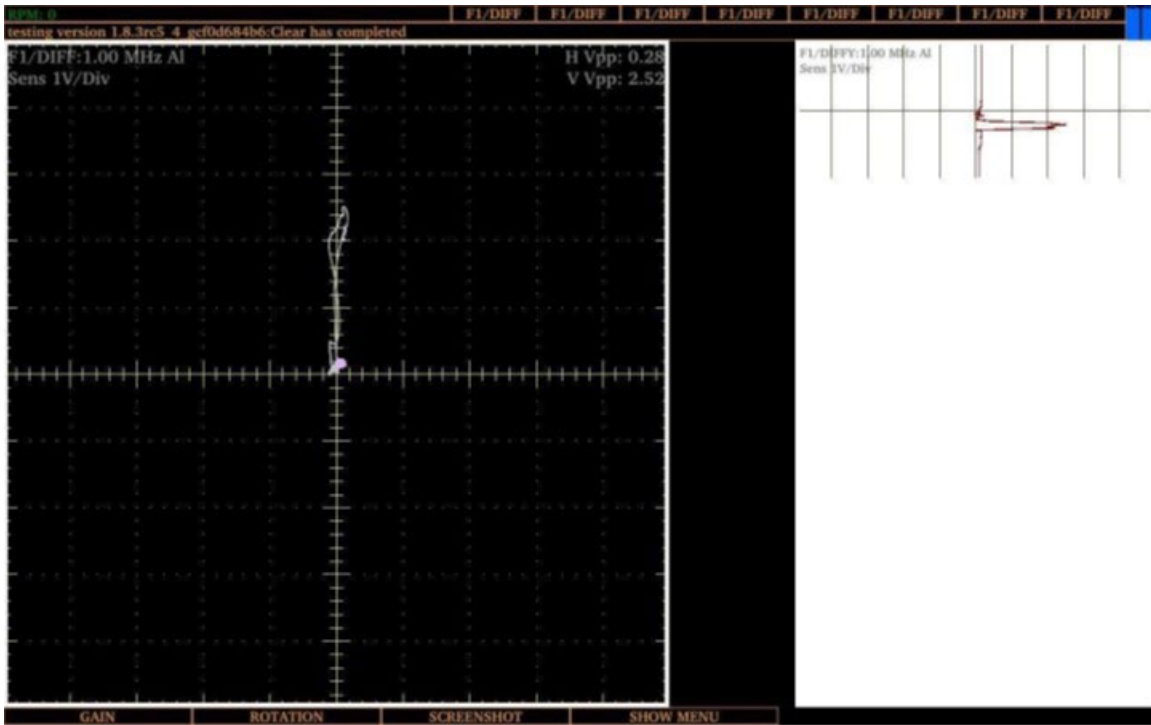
ET indication of defect at Location B in fillet weld test panel TTCI-P2
